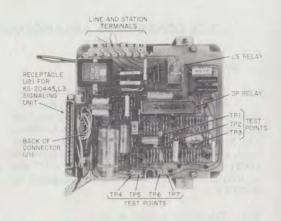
KS-20445, List 1 Control Unit, CAU, Cover Removed, Test Points
